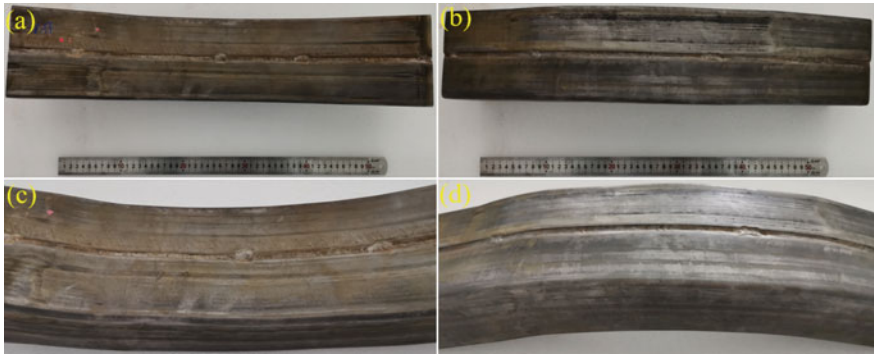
Appearance of the 22MnB5 steel pipe after delayed cracking for 1 h: a inner surface, b outer surface, c details of the inner surface, and d details of the outer surface
